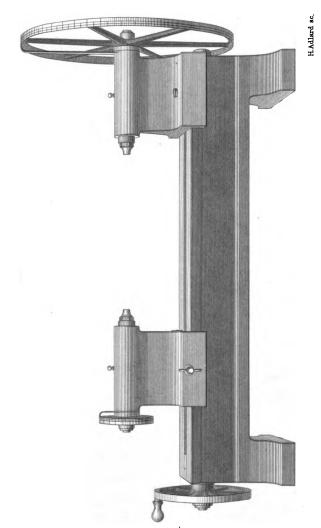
\_ PERSPECTIVE VIEW OF WHITWORTH'S WORKSHOP MEASURING MACHINE.
